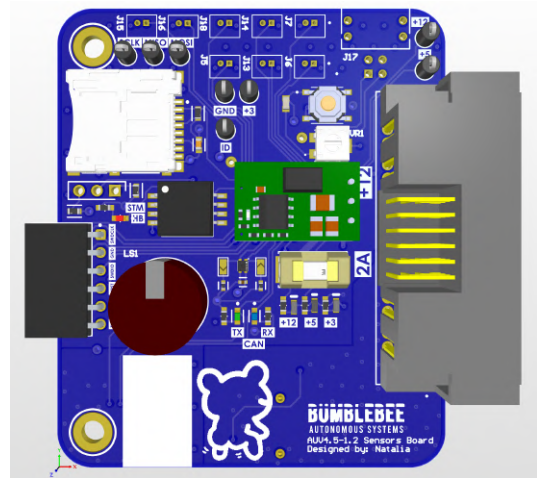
3D model of BBAUV 4.5 Sensors Board.
